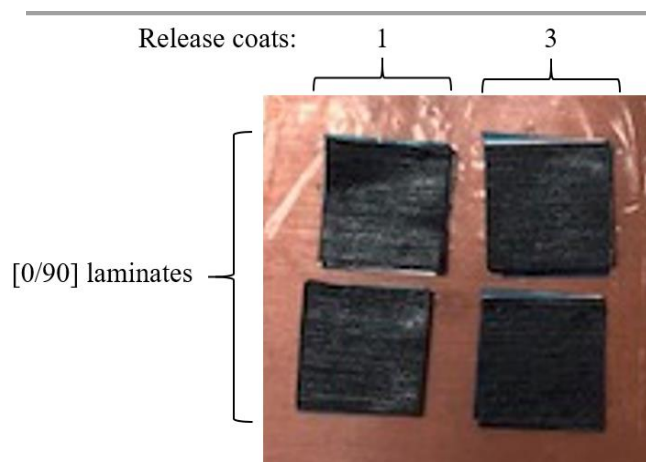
Composite laminates stacked on steel tools with different surface conditions: one and three layers of Frekote 710-NC release coating; prior to processing.
